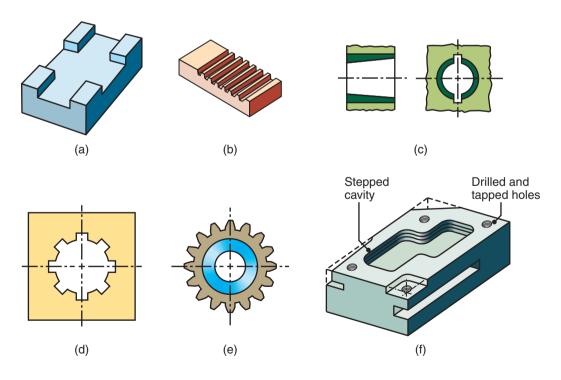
Typical parts and shapes that can be produced with the machining processes described in this chapter.
